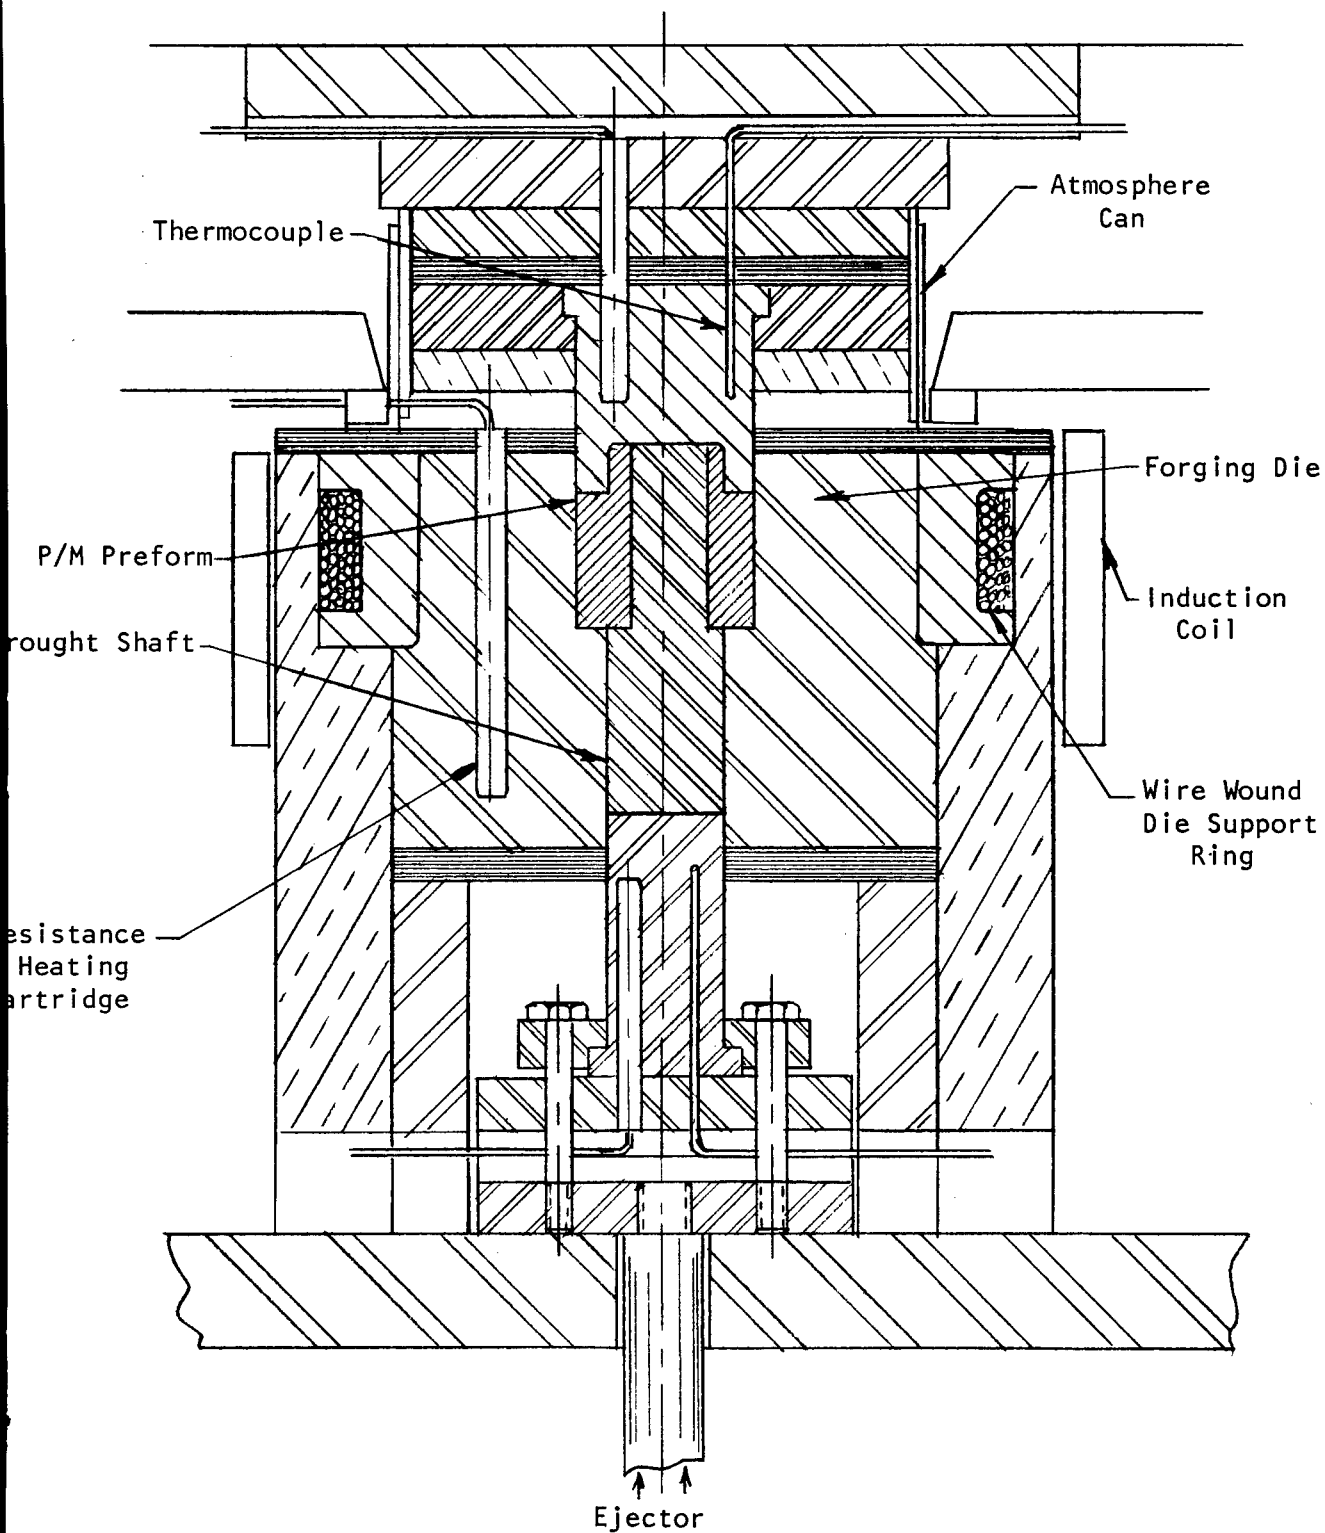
Schematic Illustration of the Hot Die Forging Tooling and Die Set.
